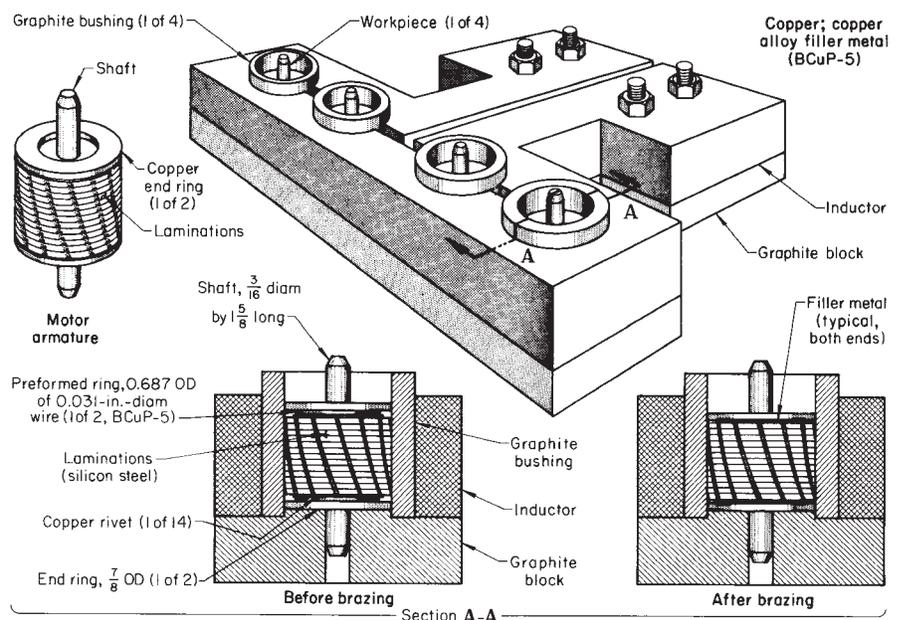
Motor armature and a four-station inductor. Used for high-production brazing of copper end rings to rivets holding armature laminations. Dimensions in inches
